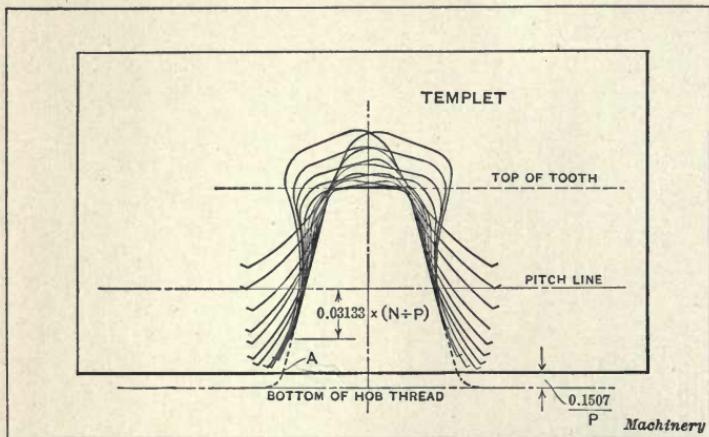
Lines scribed on the Hob Tooth Templet from a Hobbed Gear
